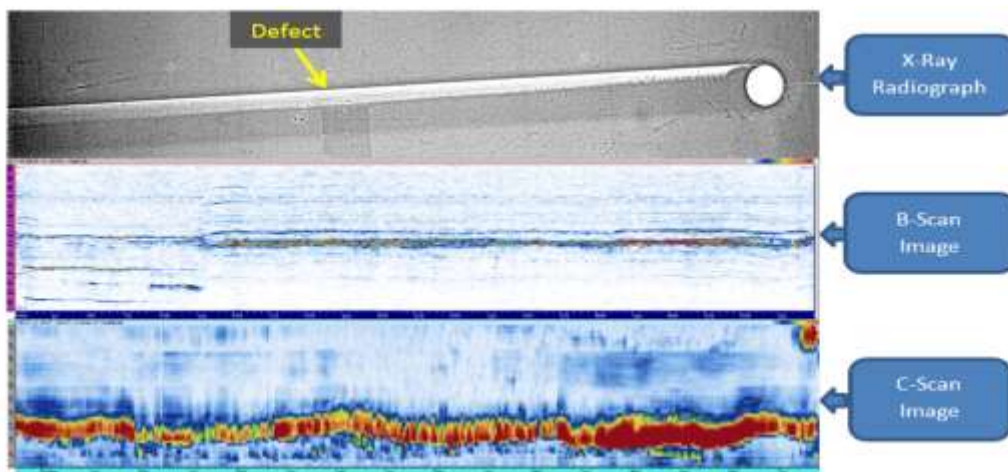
Radiographic, PAUT B-Scan, and PAUT C-Scan images of a FS welded panel with SC defect.
